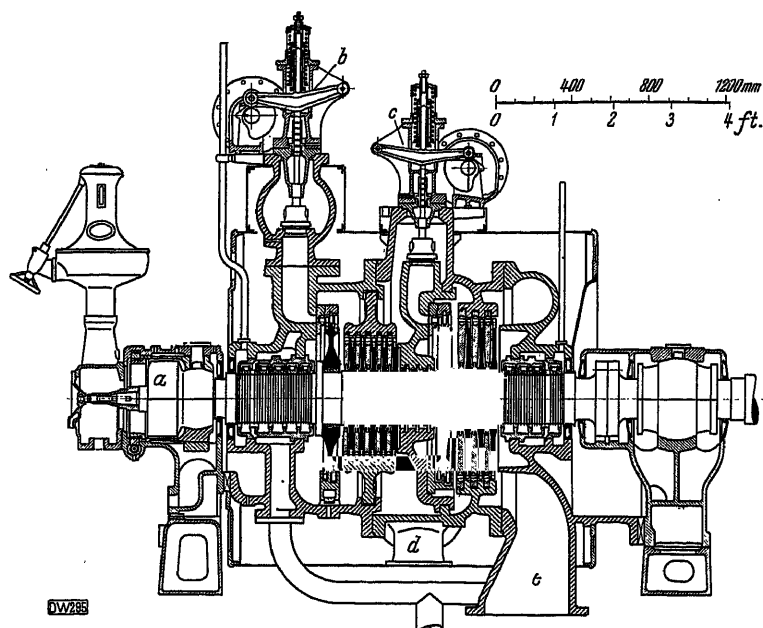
A.E.G., 2500 kw., 3000 R.P.M., extraction back-pressure turbine
